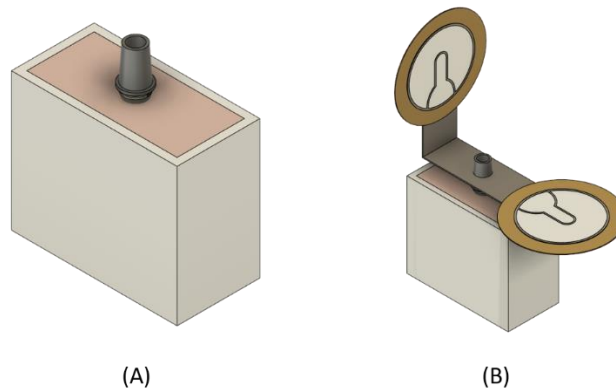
The above figures depict (A) Bone block assembly without L-Shaped Transducer (B) Bone Block with L-Shaped Transducer
